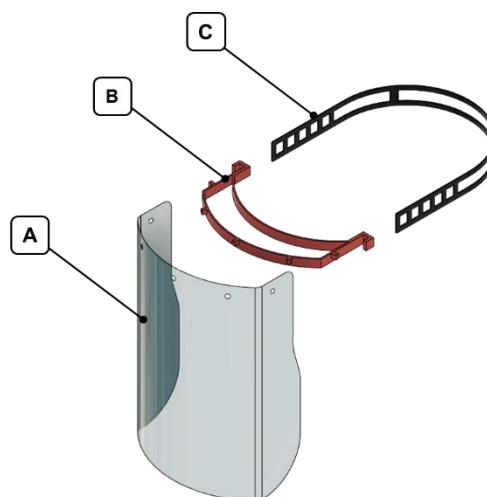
Typical components making up a face shield, a) visor, b) 3D printed headband and c) 3D printed strap.
